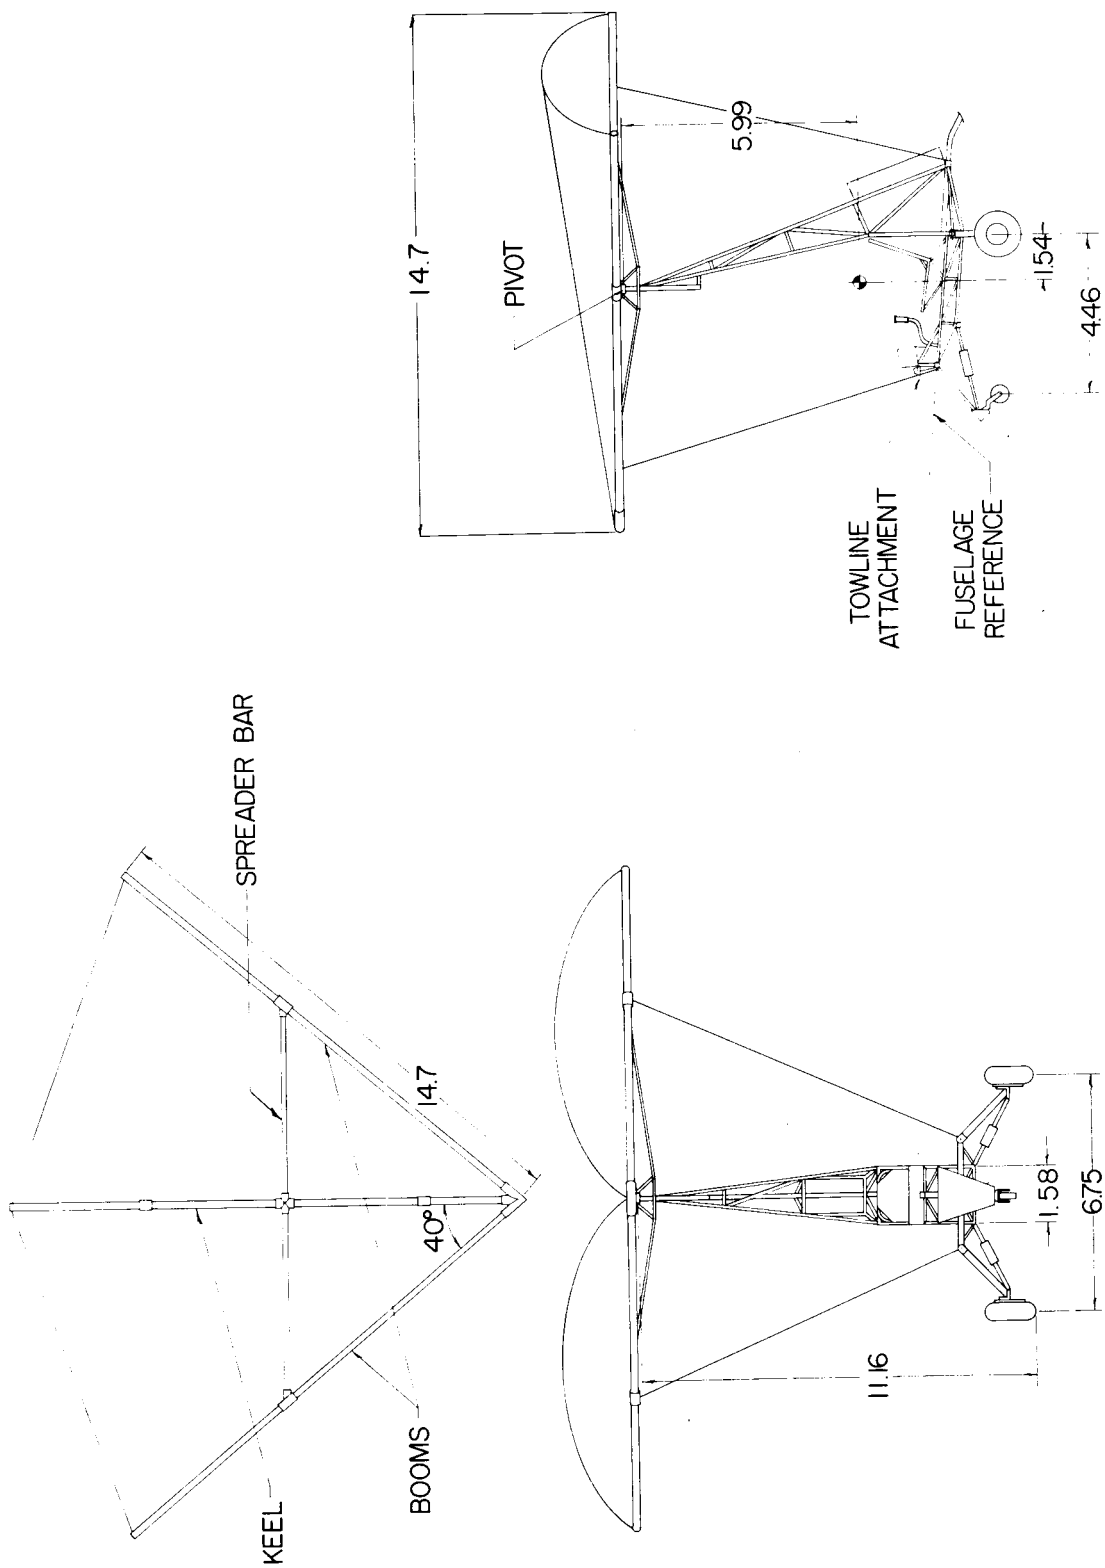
Three-view drawing of vehicle B. All dimensions in feet unless otherwise noted.
